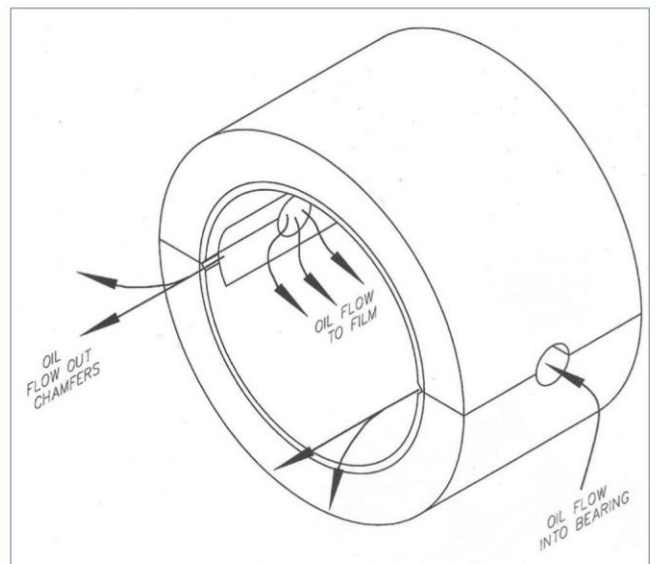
Drawing of a Sleeve Bearing Illustrating Oil Flow Paths.
